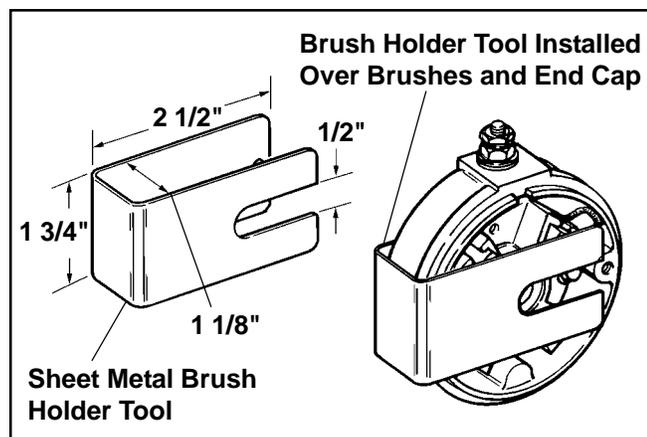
Brush Holder Tool (Style "A" End Cap).
